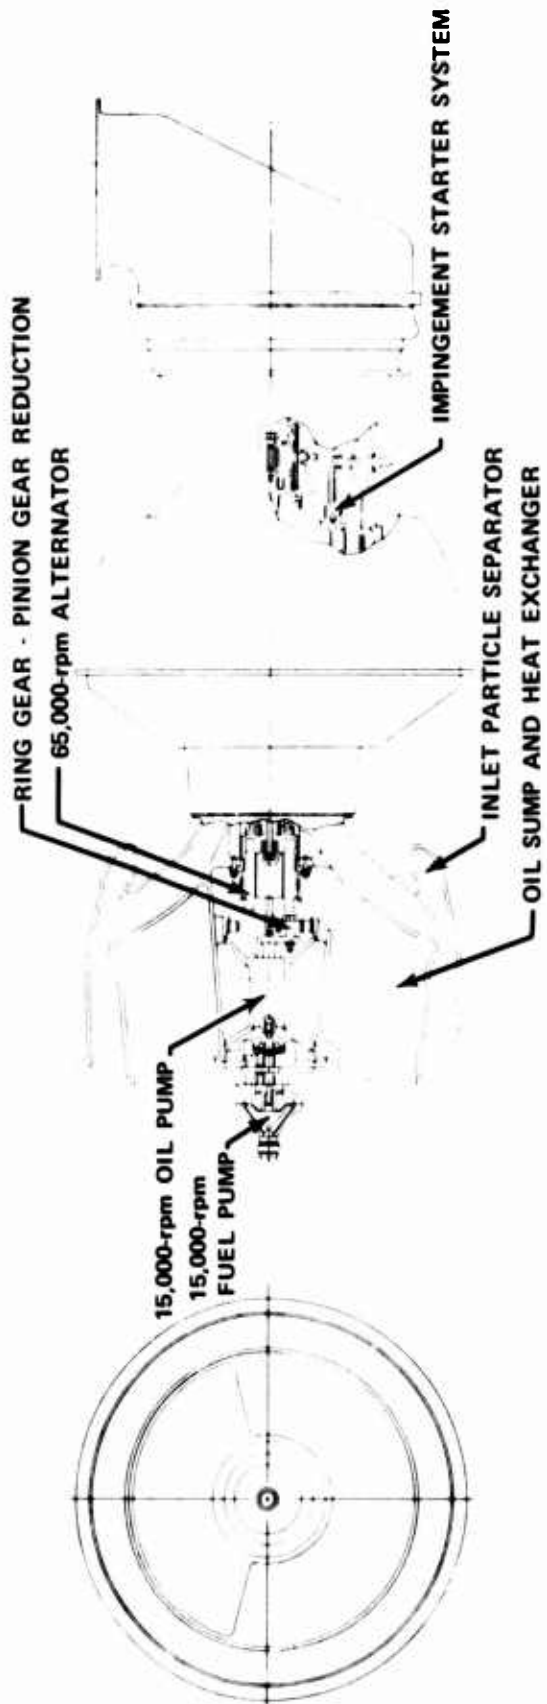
Single-Speed Drive/Impingement Starter/Integral Alternator
